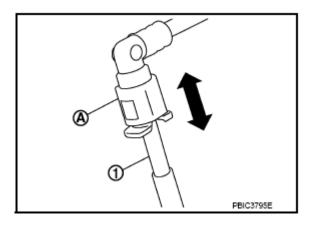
Pulling Quick Connector From Centralized Under-Floor Piping Courtesy of NISSAN NORTH AMERICA, INC.
